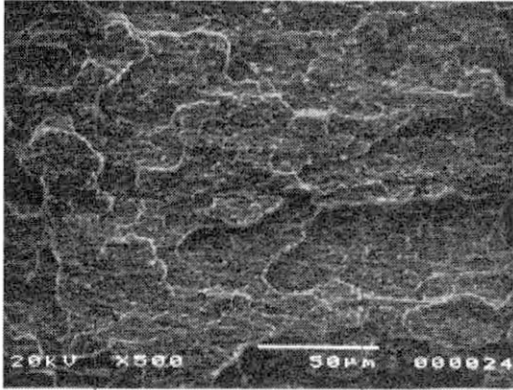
Brittle fracture pattern observed on the DHC fractured surface of the Zr-2.5Nb tube.
